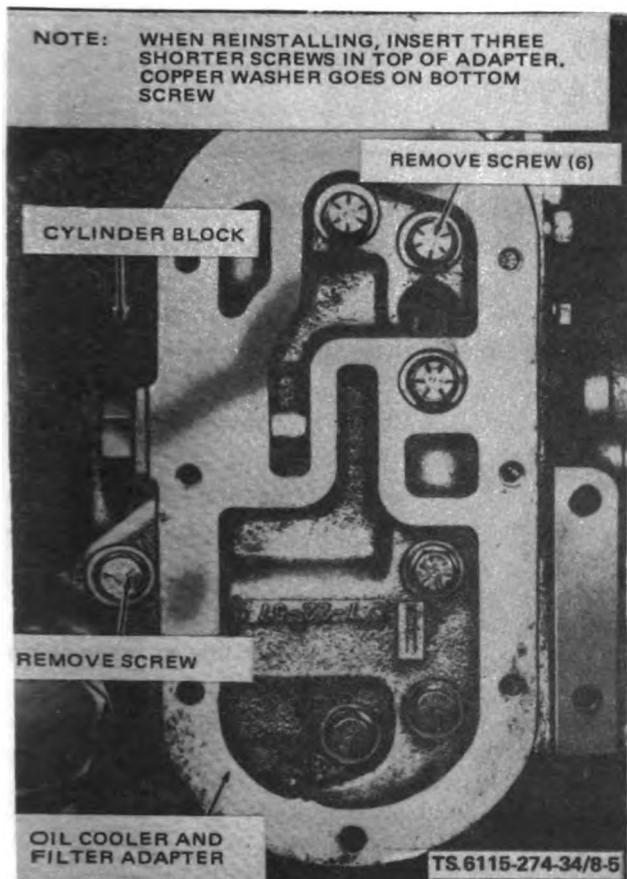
Oil Cooler and Filter Adapter, Removal and Installation
